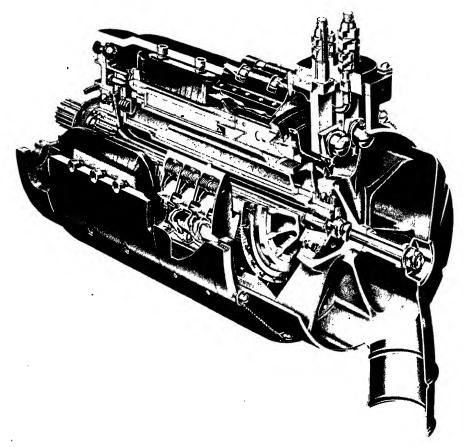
A cutaway view of an engine driven generator assembly. (Courtesy Jack & Heintz, Inc.)
